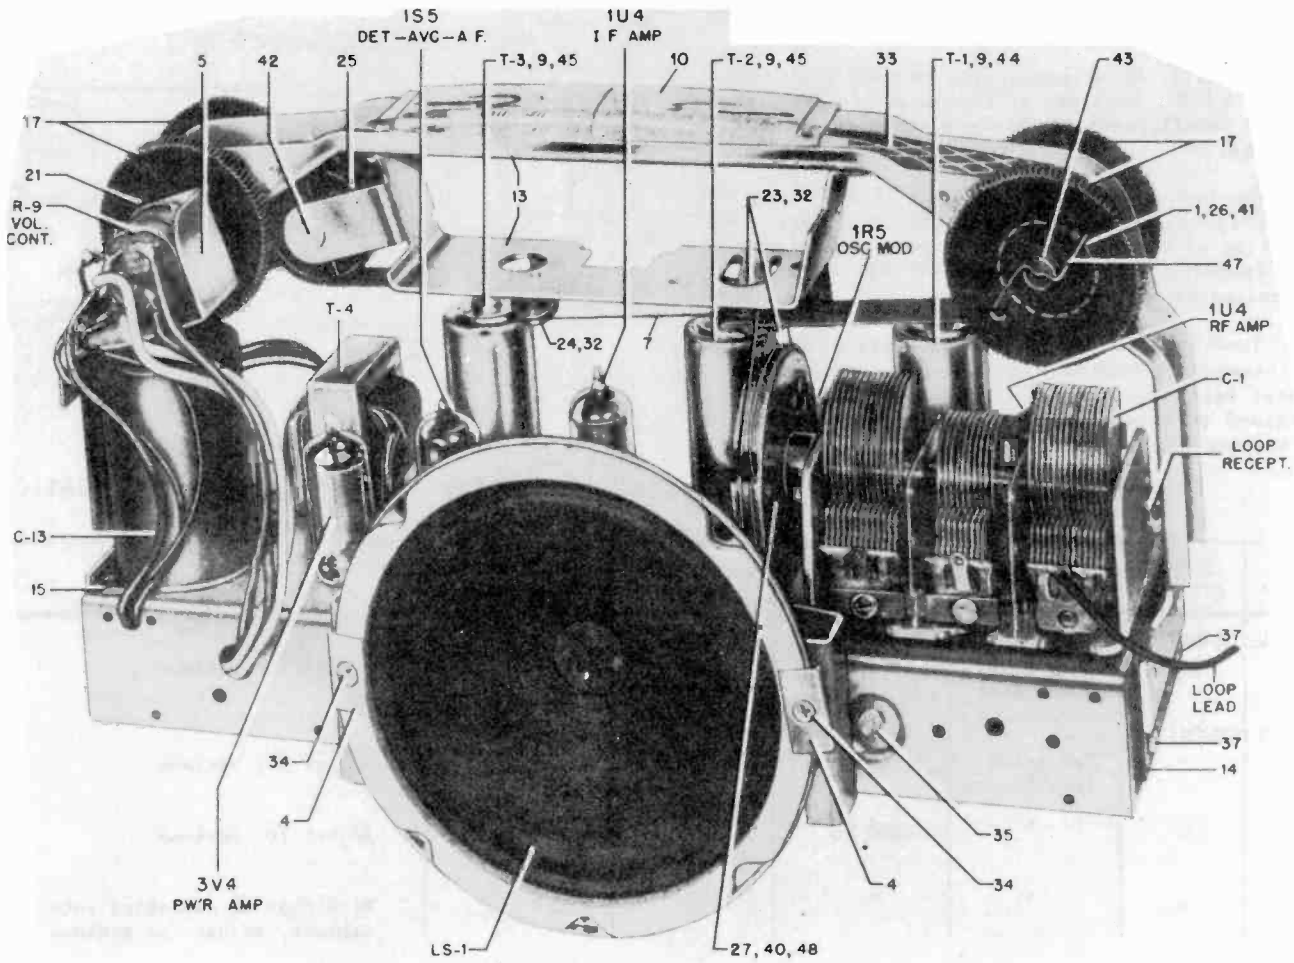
PARTS LOCATIONS - CHASSIS TOP & BOTTOM
